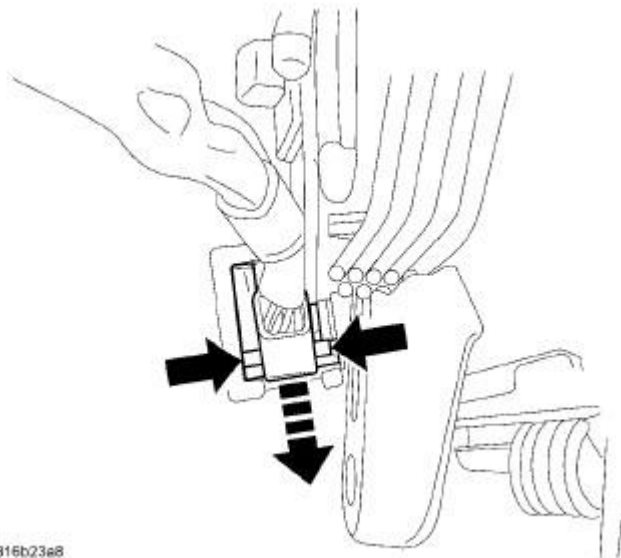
REMOVING WIRING HARNESS CONNECTOR
